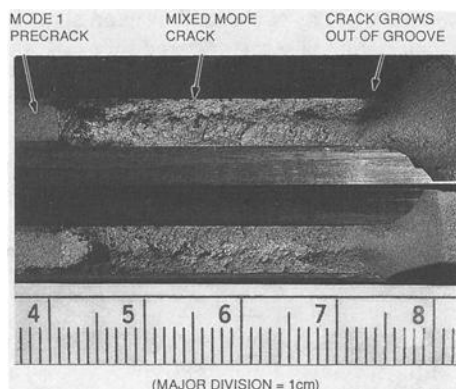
Fracture surface from specimen which exhibited self-similar mixed mode fatigue crack growth.
